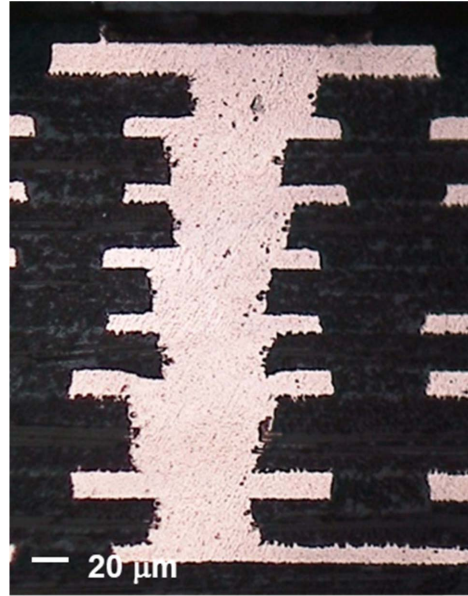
Optical cross-sectional image of PCB sample which has misalignment during fabrication.
